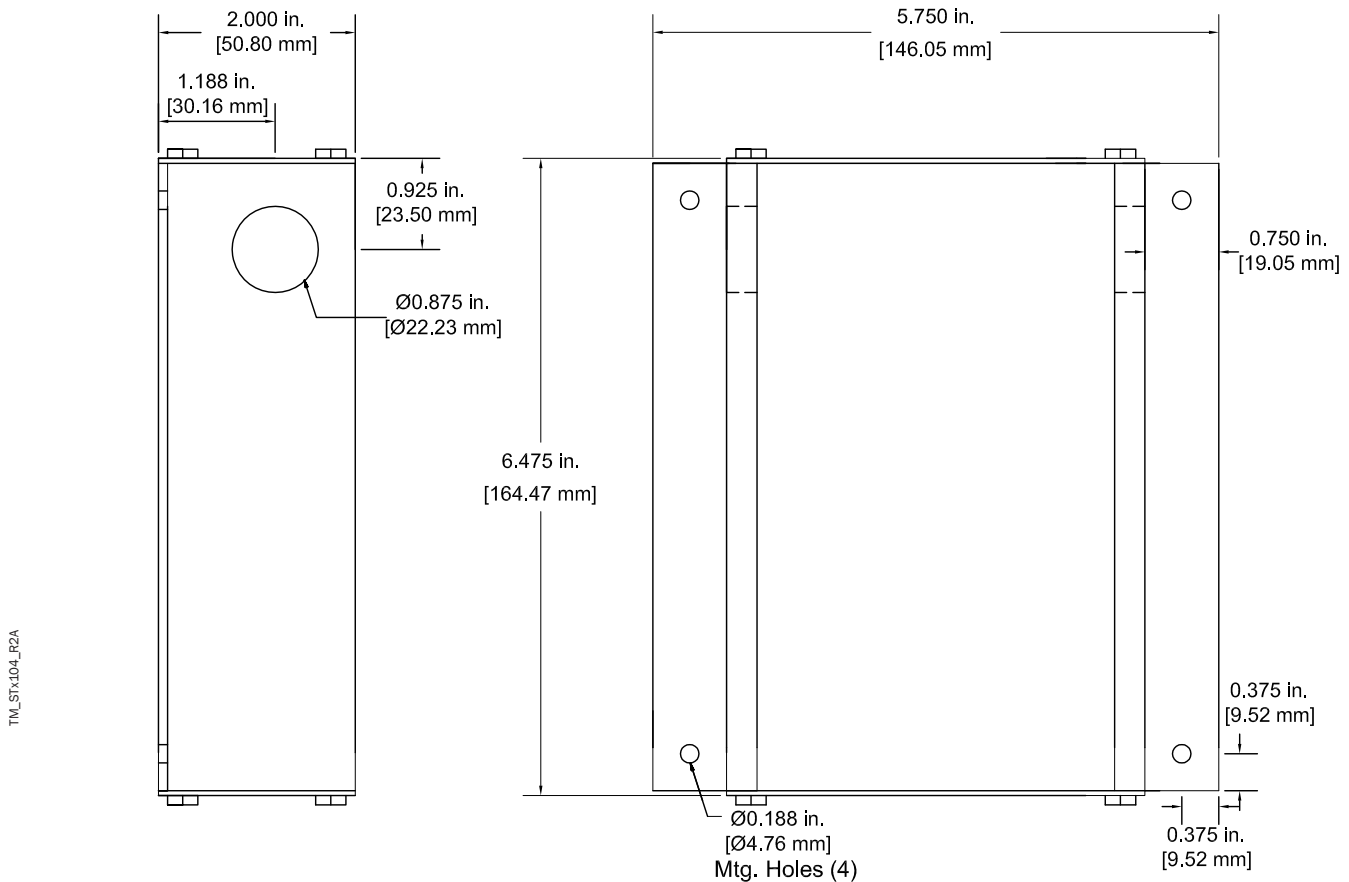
STx104 Transmitter Mechanical Detail Drawing
